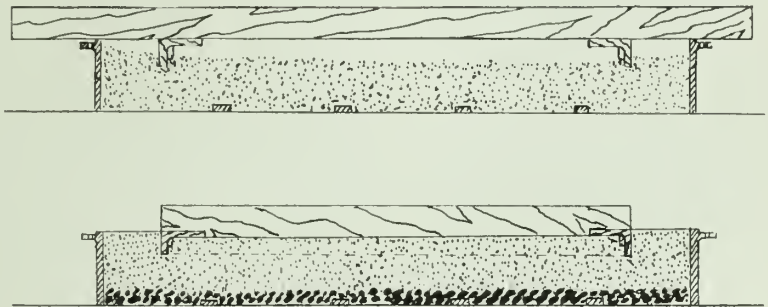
SHOWING TWO VIEWS OF DRAG MOLD.
